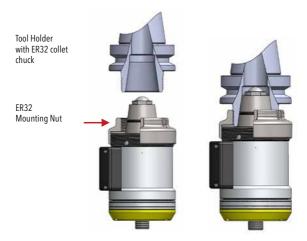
HSM Jet Spindle holding with ER32 collet chuck
